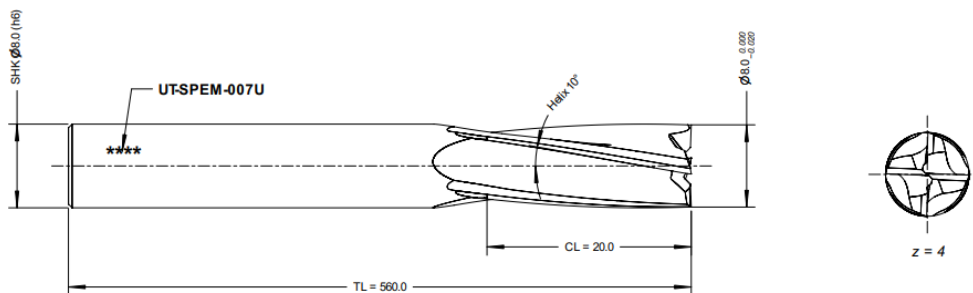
Drawing of end mill carbide with diameter 8mm, 4 flutes and helix angle 10°
